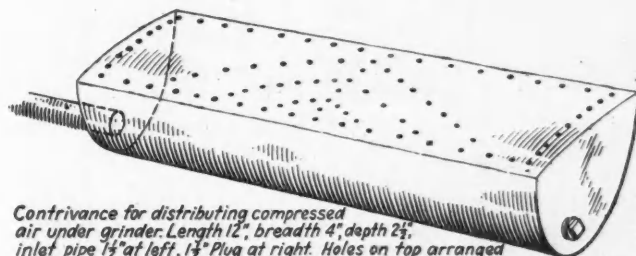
DEVICE FOR DISTRIBUTING COMPRESSED AIR UNDER GRINDER
